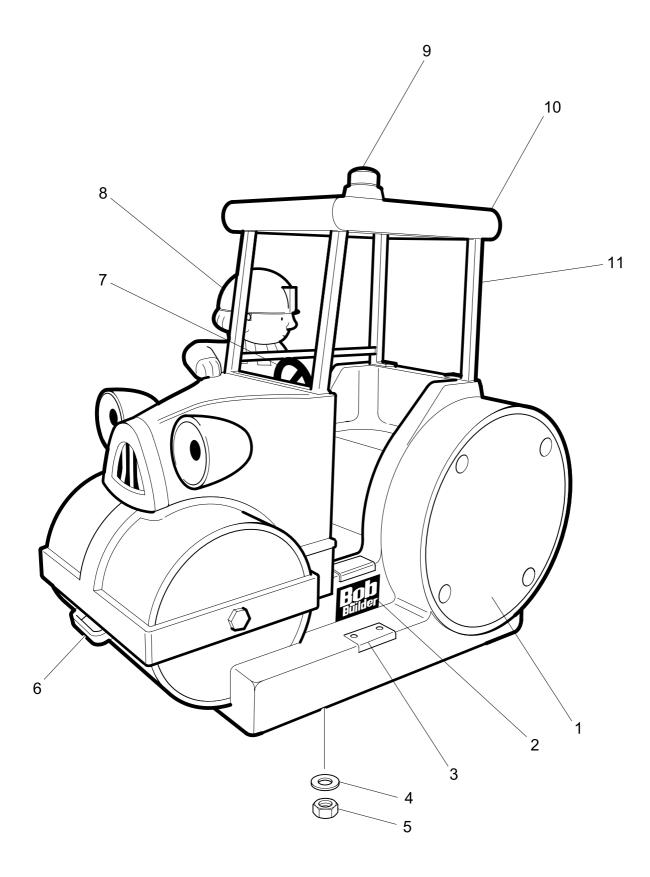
Bob the Builder (Roley) Body Shell Assembly
